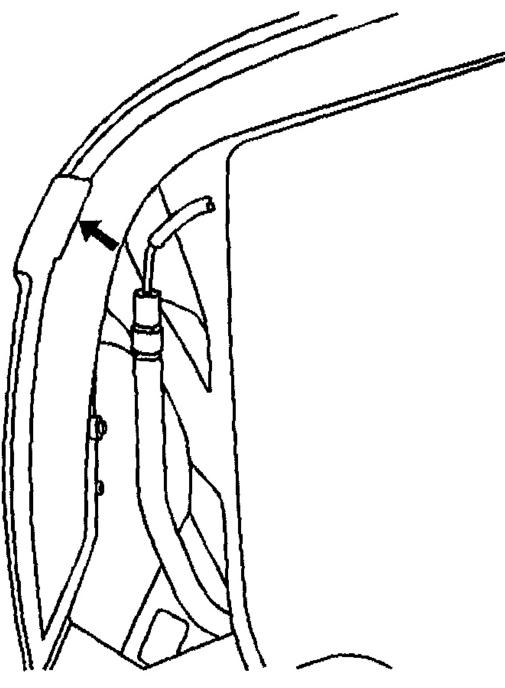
Identifying #5 Bow Glare Cover Screws Courtesy of GENERAL MOTORS CORP.
